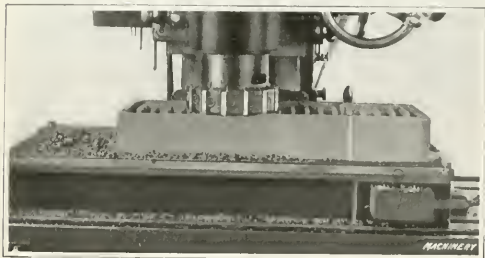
Magnetic Chuck used for holding Work for End-milling
